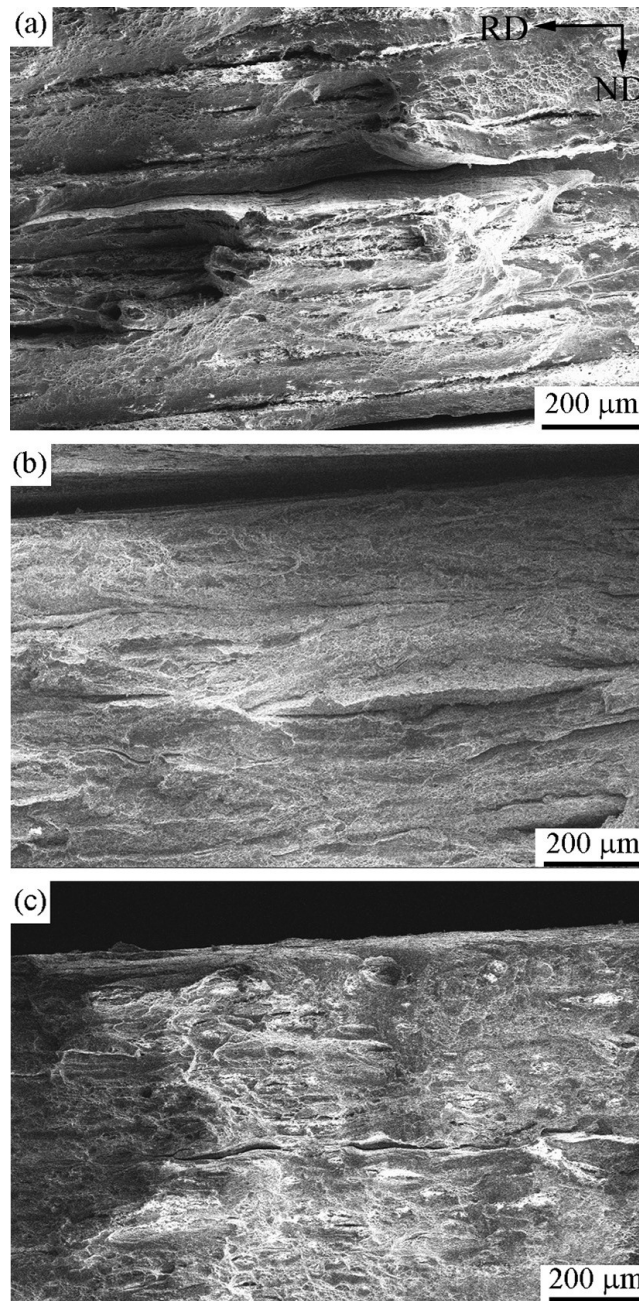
Fracture surfaces of the Al/Cu/Mn composites after 2 (a), 5 (b), and 9 (c) cycles.
